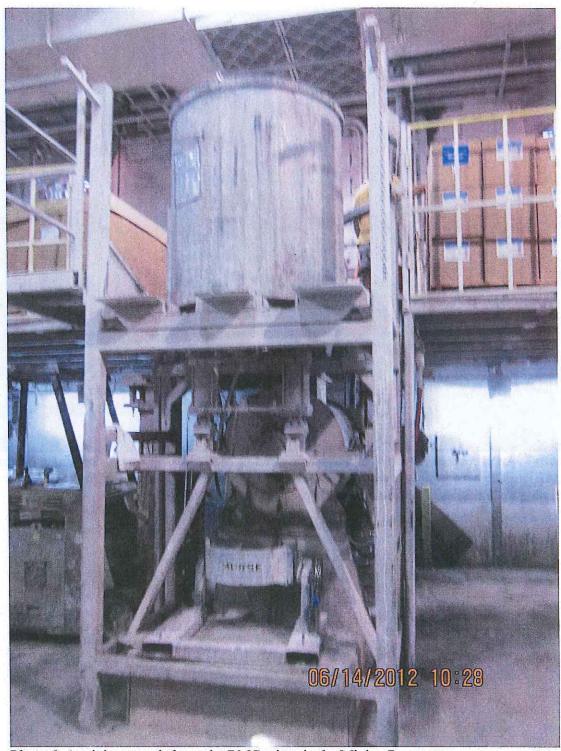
A mixing vessel above the BMC mixer in the Mixing Room.
